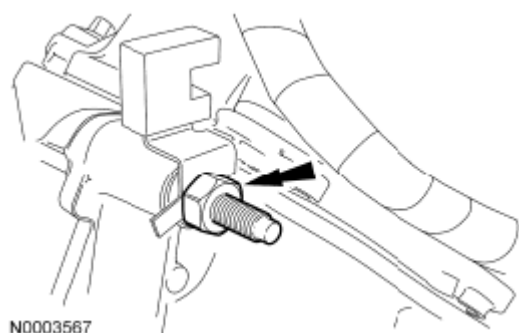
Locating Radio Ignition Interference Capacitor And Stud Bolt
